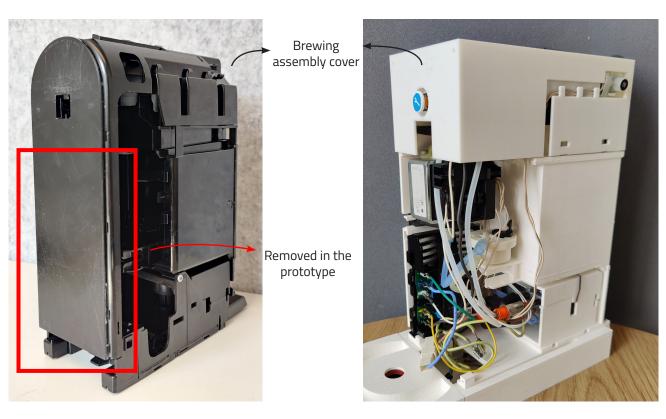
Back panel of the brewing assembly cover has been removed making it easier to access internal components
